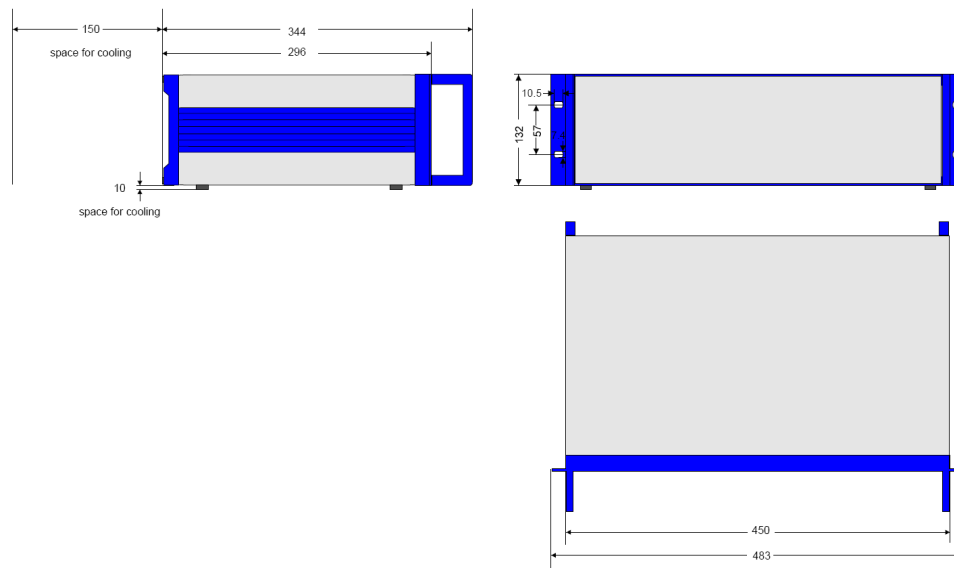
E-712.R2 and E-712.R3 dimensions in millimeters
